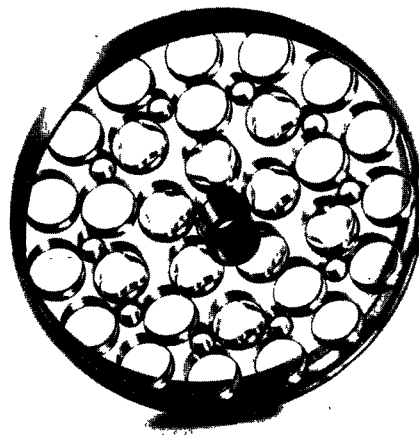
Test model of spacer design for Marviken boiling fuel assembly
